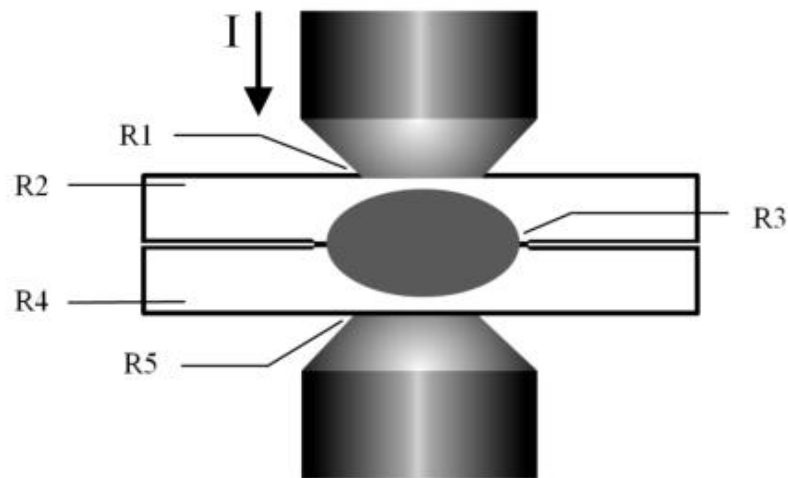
Schematic drawing of resistance spot welding in a sheet stack-up [67]
